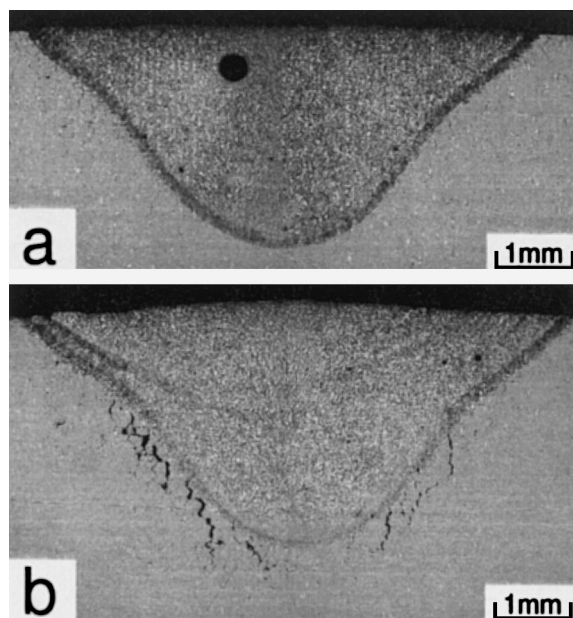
The cross-sectional metallography of weld D3 (He = 8.3 appm) welded at 7.1 kJ/cm. The cross-section in (a) obtained from the middle of the bead contained no cracking while that in (b) obtained from the crater treated position contained sub-surface cracking.
